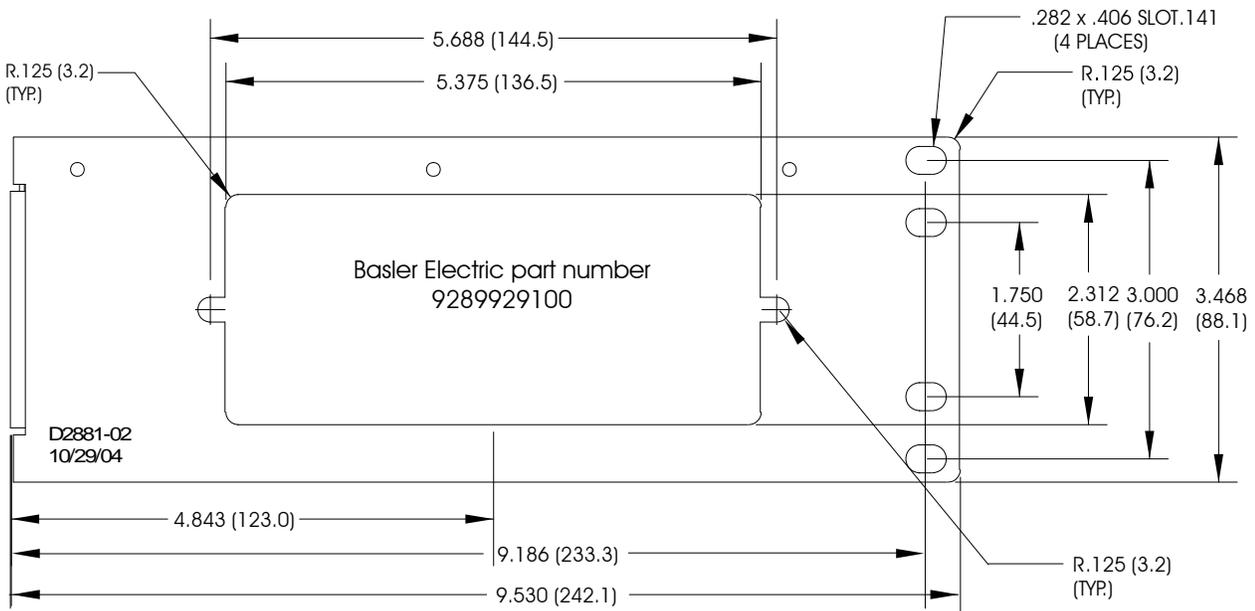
Adapter Bracket for 19-inch Rack Mount with ABB FT Cutout Switch
